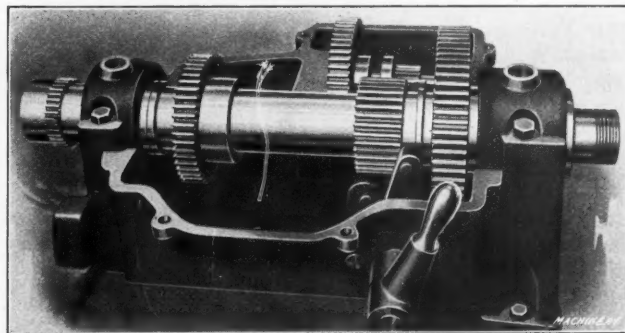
Back-gears on 14-inch Lathe and Lever for throwing them into Engagement
